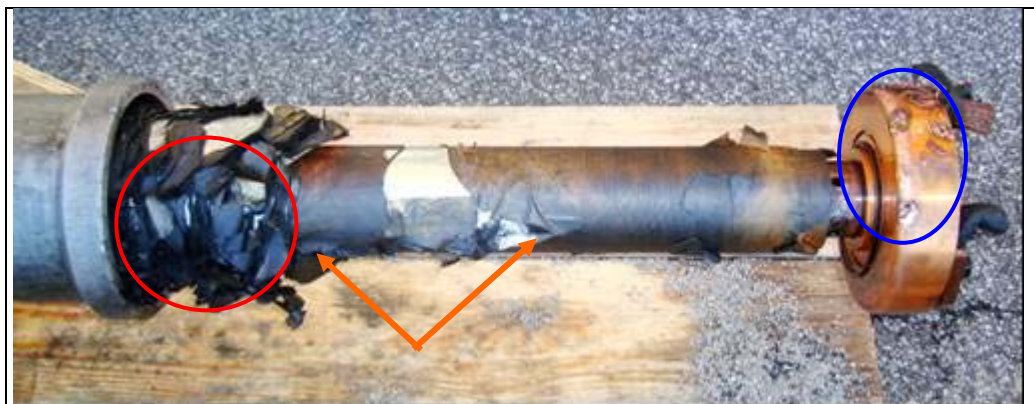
General view of the bushings after disassembled from the Transformer Unit #21
